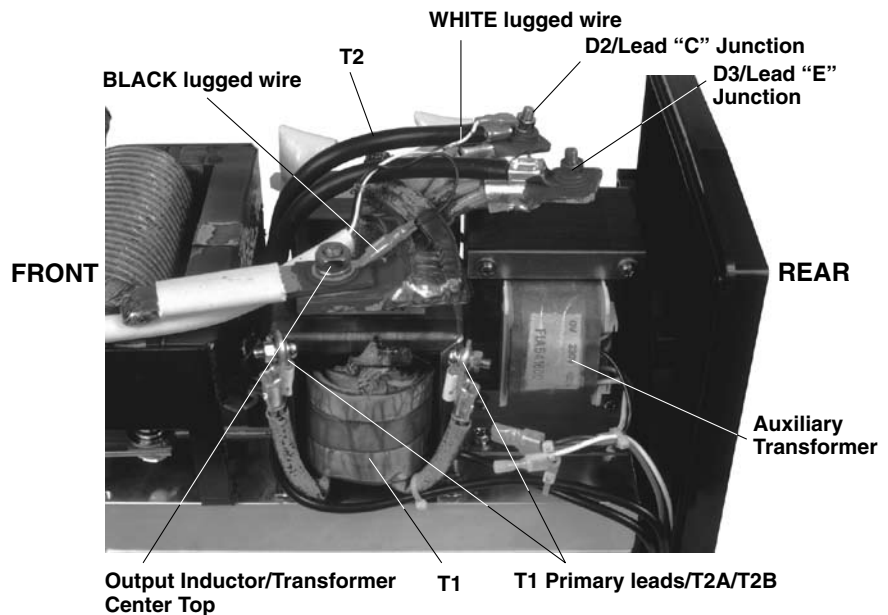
Preparation for removal of Main Transformers T1/T2 (shown in GMS model, with insulating boots removed from T1 leads; left side of unit)
